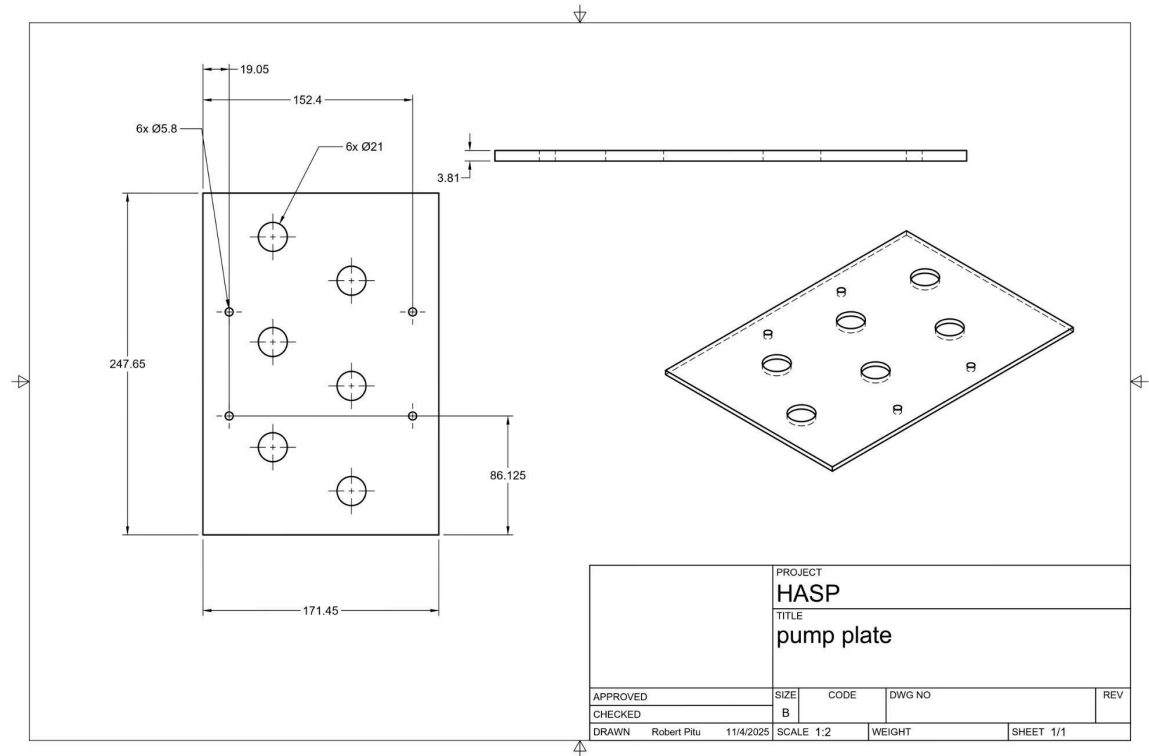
Engineering drawings of the payload mounted vacuum pump plate
